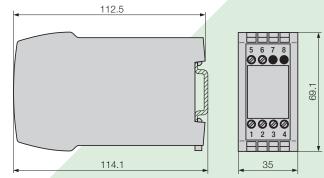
SINEAX U 539 in housing P8/35 clipped onto a top-hat rail (35×15 mm or 35×7.5 mm, acc. to EN 50 022).
